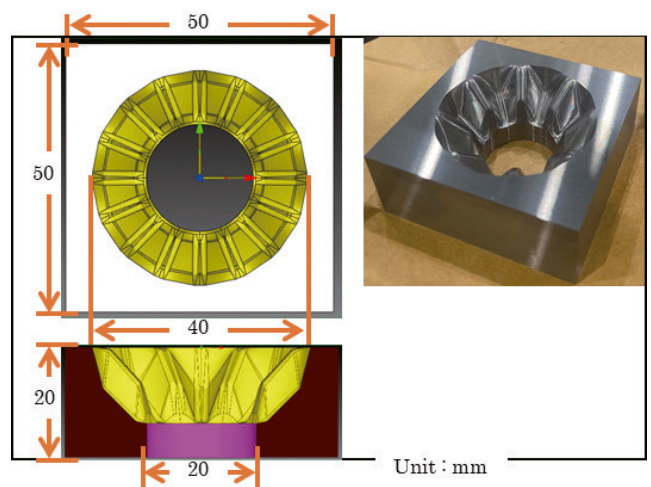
Machining Model of Gear Die and Actual Machined Product
